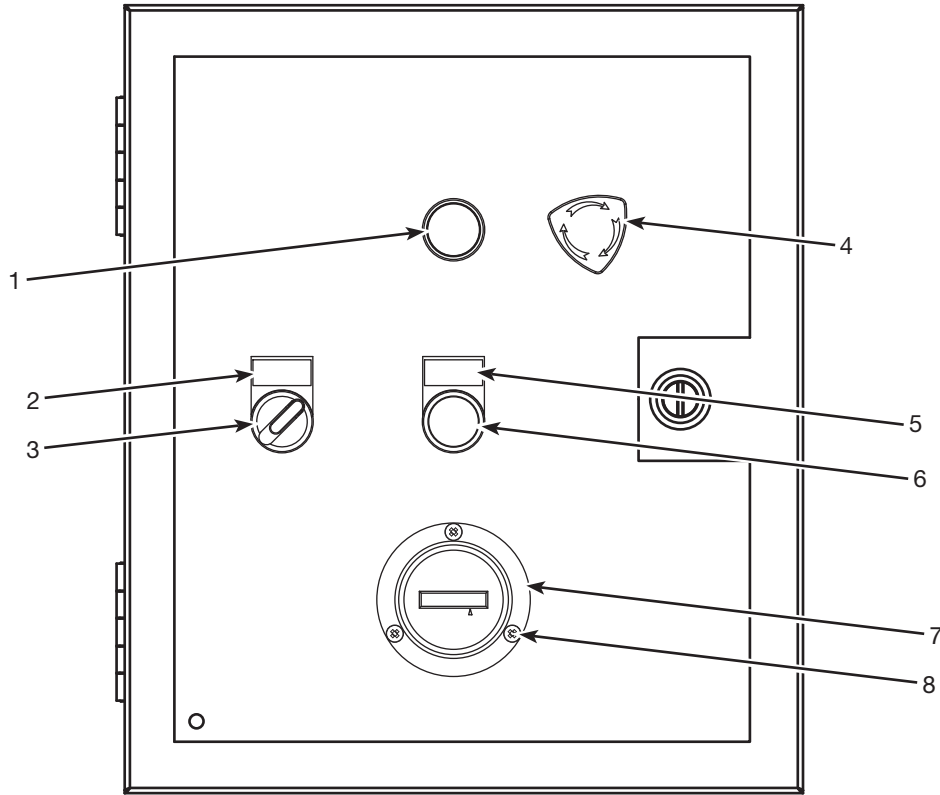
Repair Parts Illustration for 5 HP - 10 HP Rotary Screw Control Box Door Assembly
